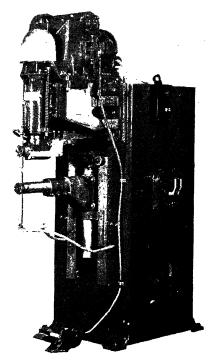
Press welder. It is used for spot-welding and similar applications.
